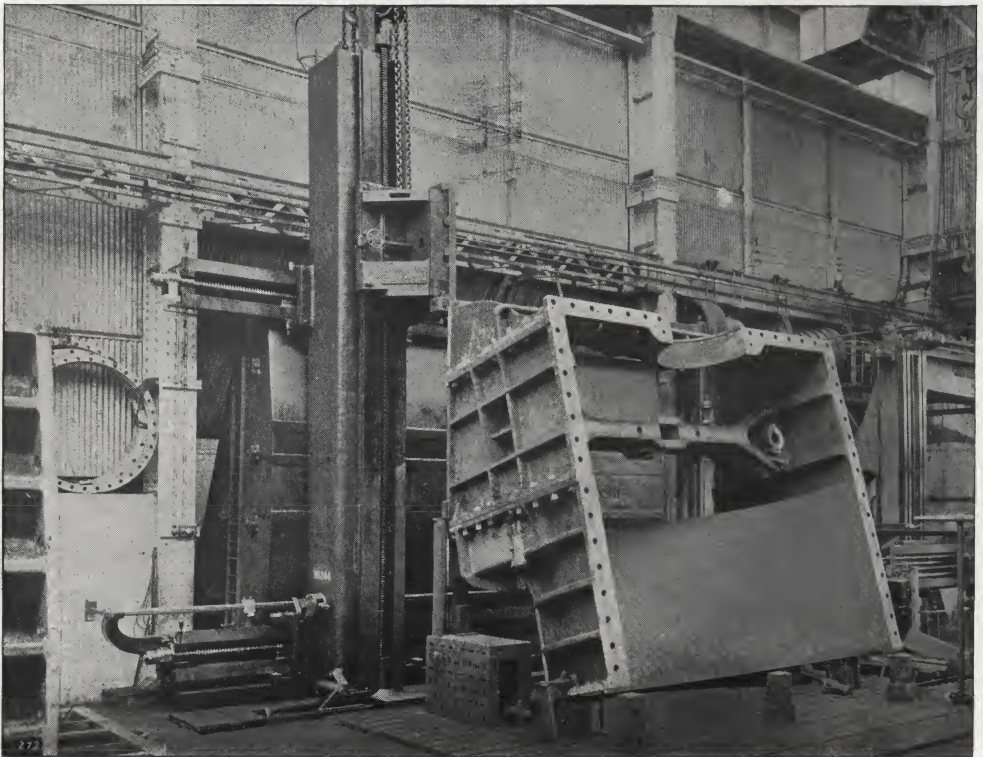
Part of Exhaust End of L.P. Turbine in Planer.
